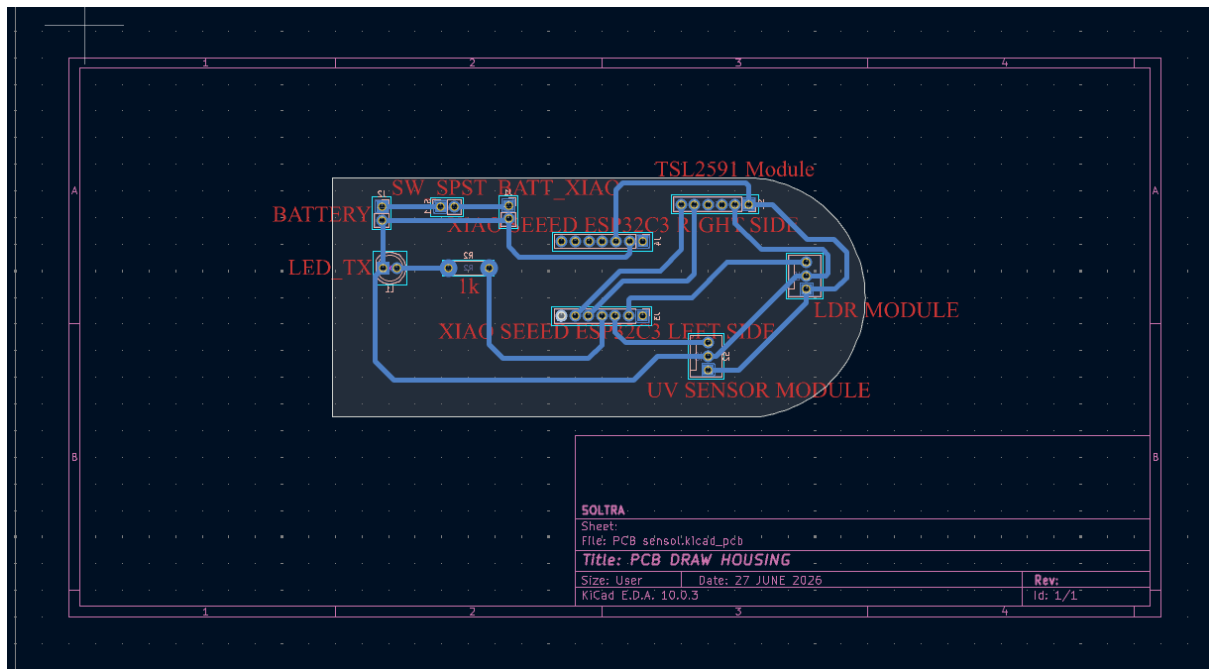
Full Pcb Connection In Kicad PCB Editor
